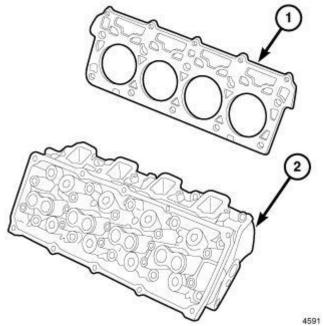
Cylinder Head Components Courtesy of CHRYSLER LLC
